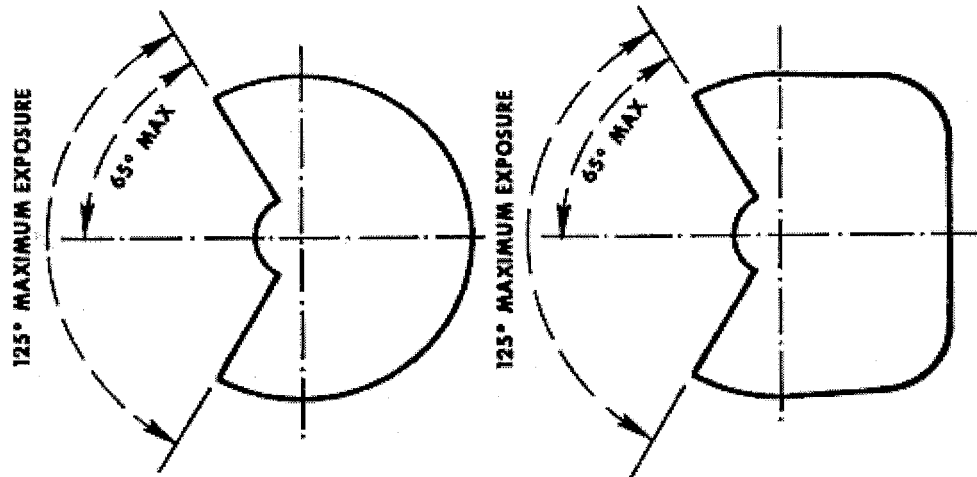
Cylindrical Grinder Guard Exposure Angles.
